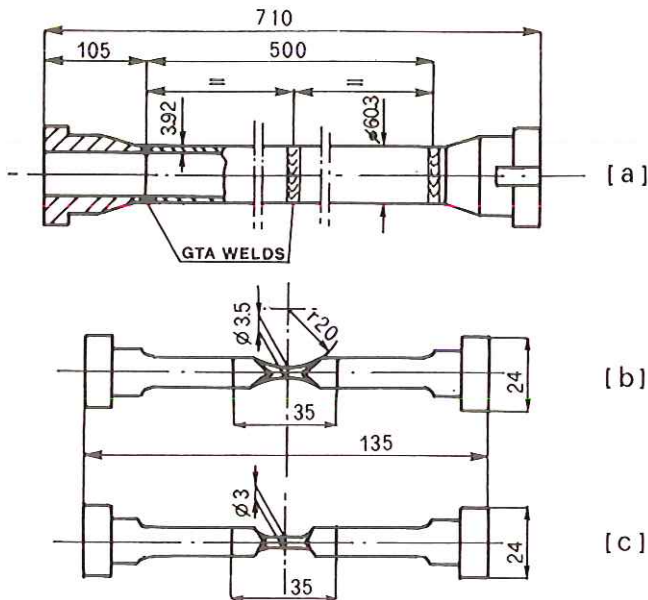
Specimens for (a) multi-axial tests, and (b) and (c) uni-axial tests
